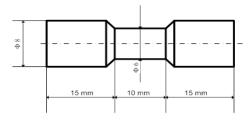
Shape and dimensions of the sub-sized specimen for tensile-test, after ECAP with 4 passes
